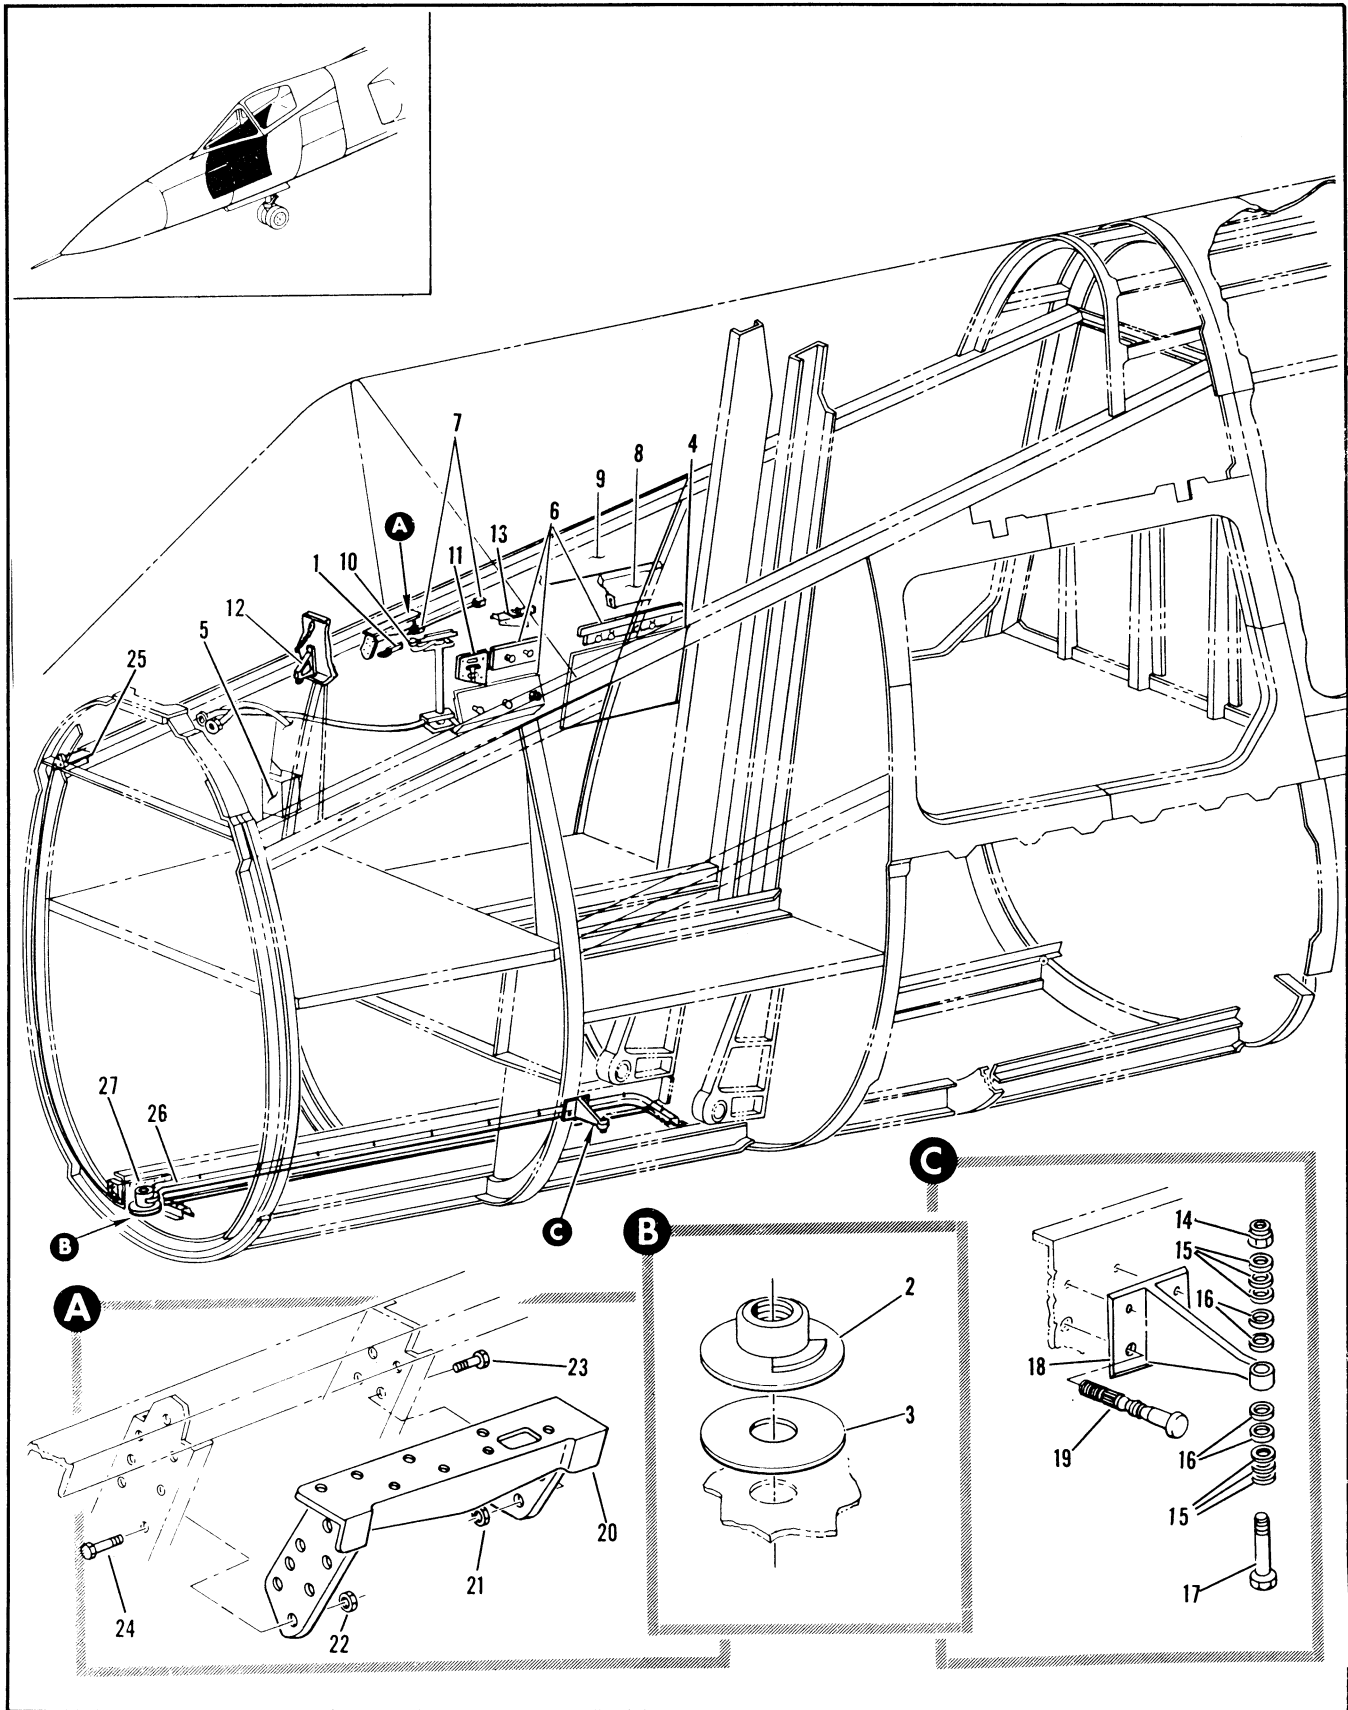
RH Side Panel Equipment Assembly Sta 102 to 172
